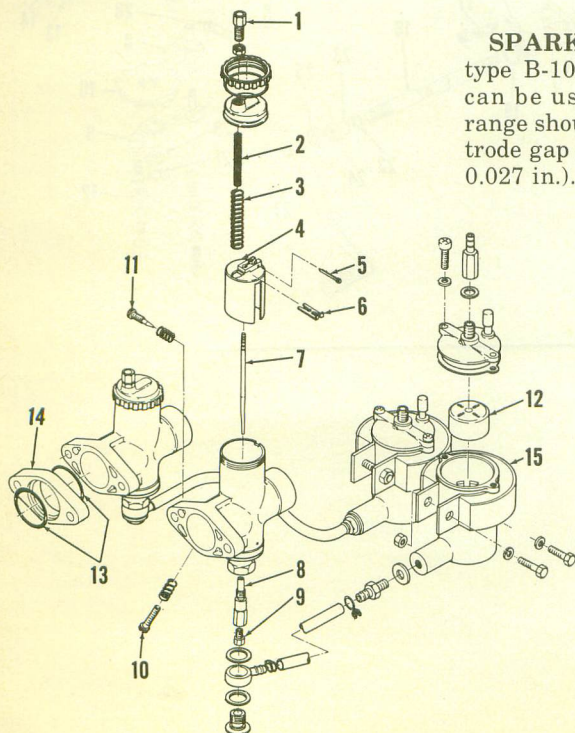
Exploded view of Mikuni VM 276 carburetors and float bowls.
